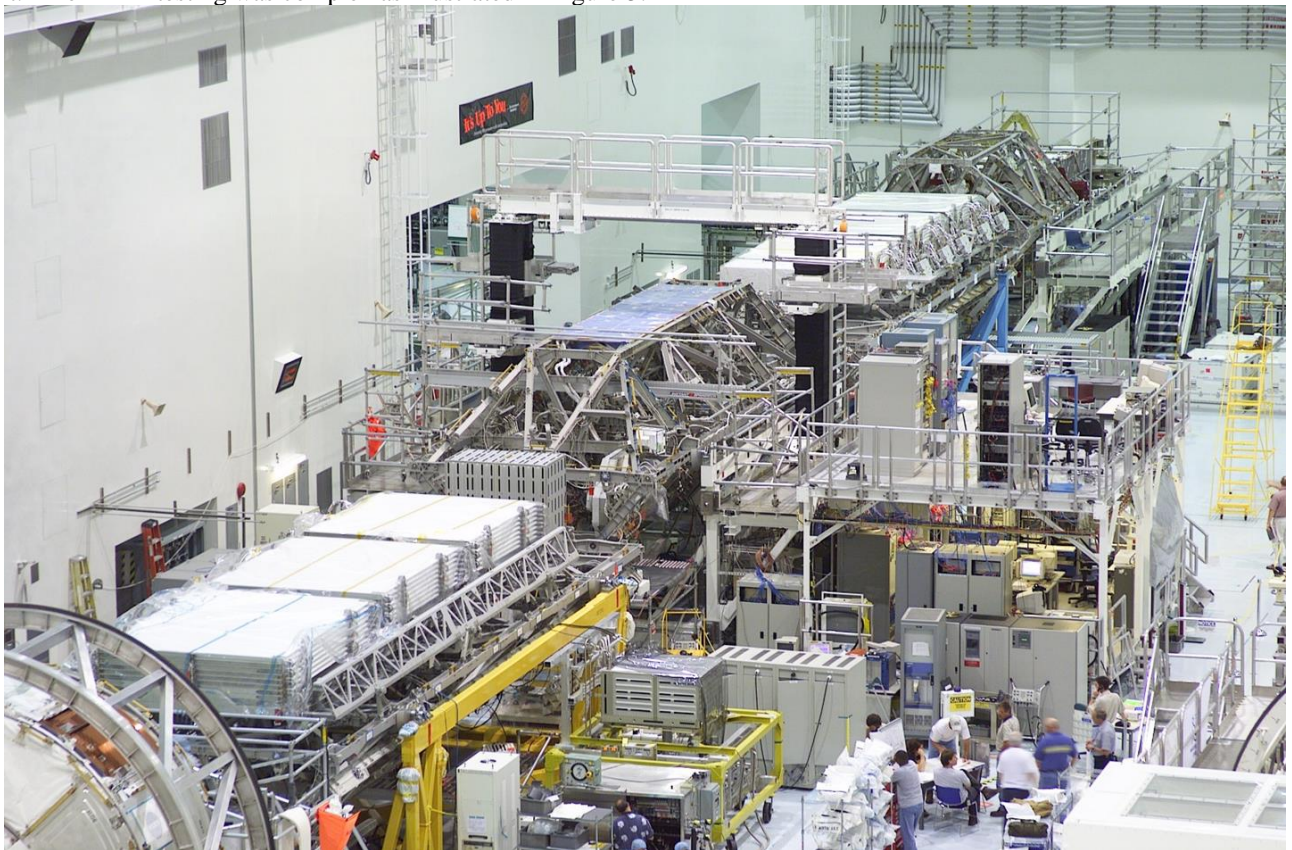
The layout of ISS elements used in Multi-Element Integration Tests to confirm interfaces worked as planned (at the KSC Space Processing Facility)
